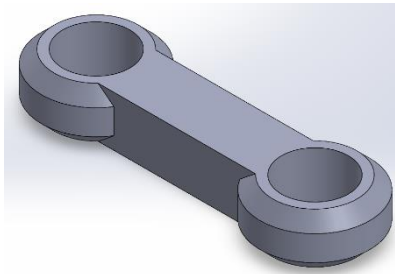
A Claw Pincher for the Robotic Arm. There are two points which the Pincher Gear & Pincher Stabilizer can be attached to this piece without adhesive.
